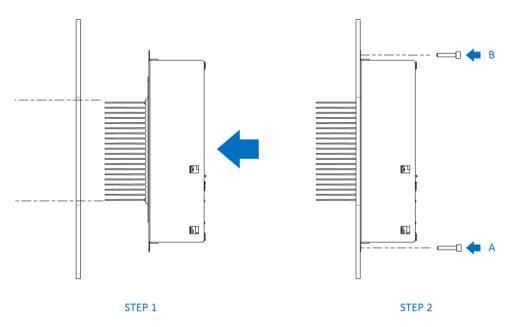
Mechanical Mounting of PIU Duct Mount
